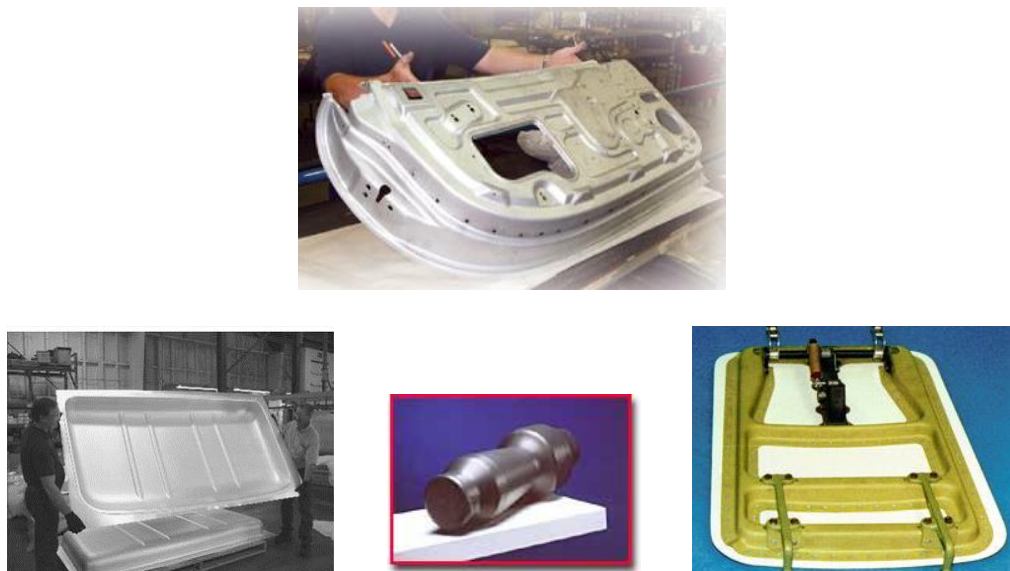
Example of parts formed by SPF: car door assembly [112] (top), one piece truck cab roof [10] (left), sensor housing [111] (center), aircraft door assembly [108] (right).
